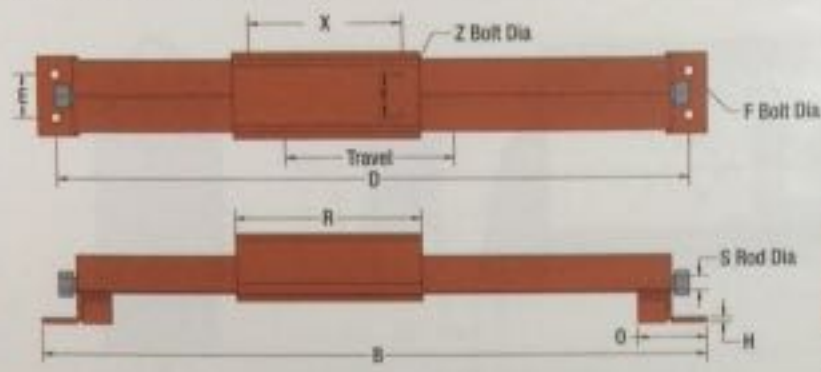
A TUHD BEARING BOLT PATTERN EX.
